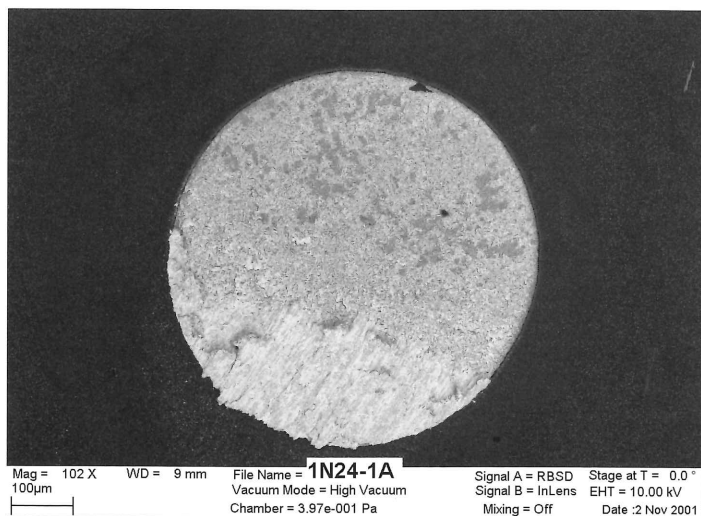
SEM image of failed solder joint due to excessive shear stress. Lateral cup and cone is present in the remaining solder viewed in the lower portion of the pad. The fracture occurred through the intermetallics along the upper two thirds of the pad.
